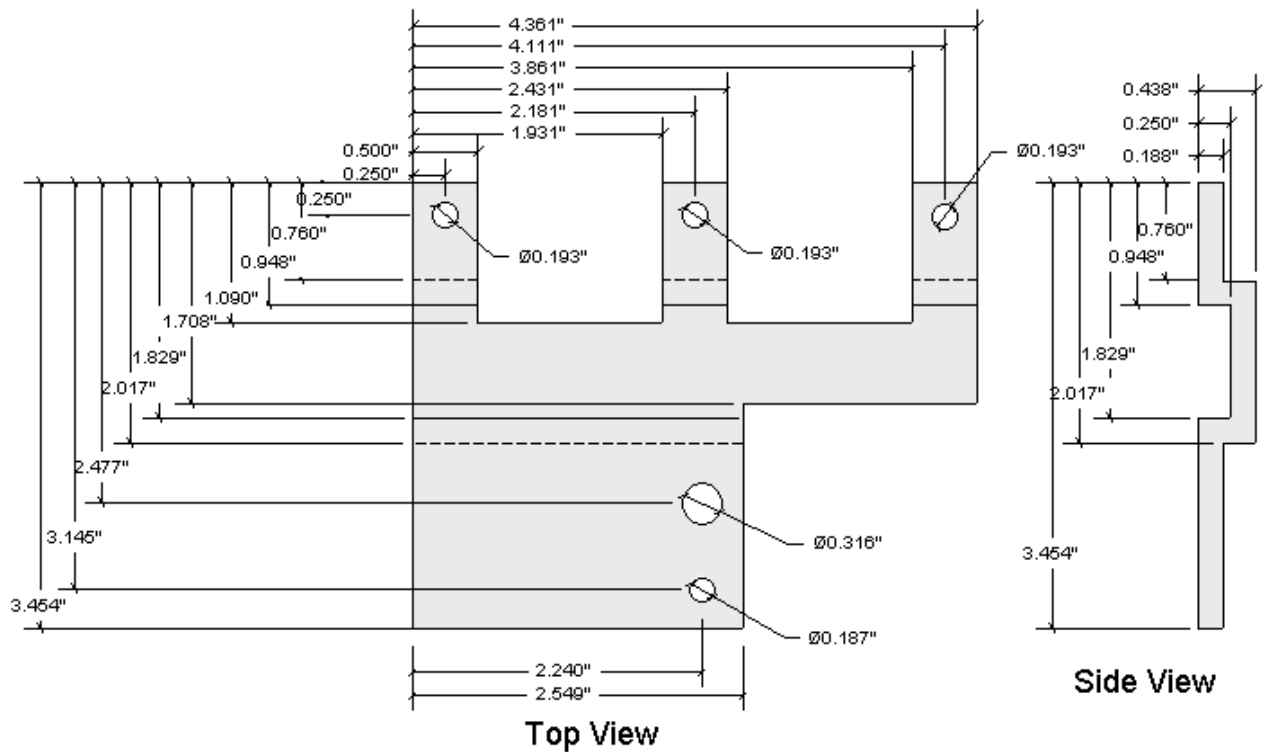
Mechanical Drawing of section 3 of Bus Bar Assembly
